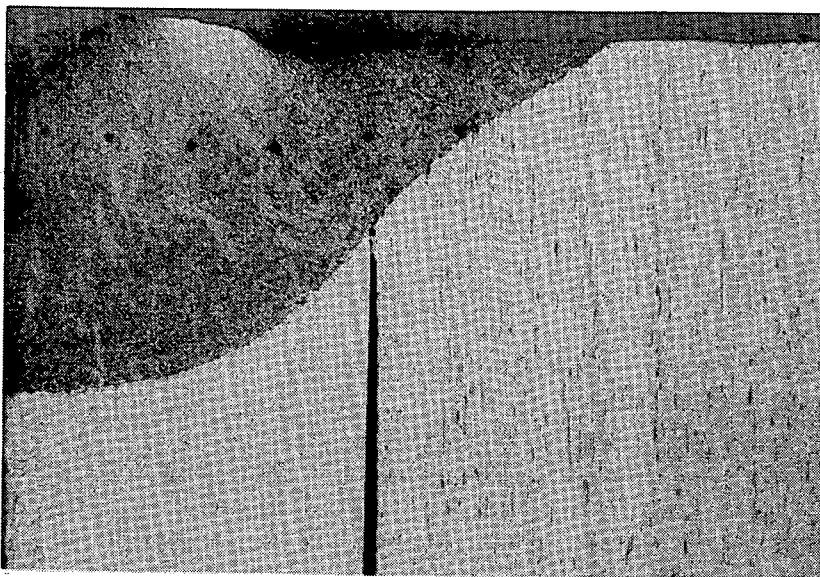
Source M-71; stainless steel outer container; top weld (60.5X).
